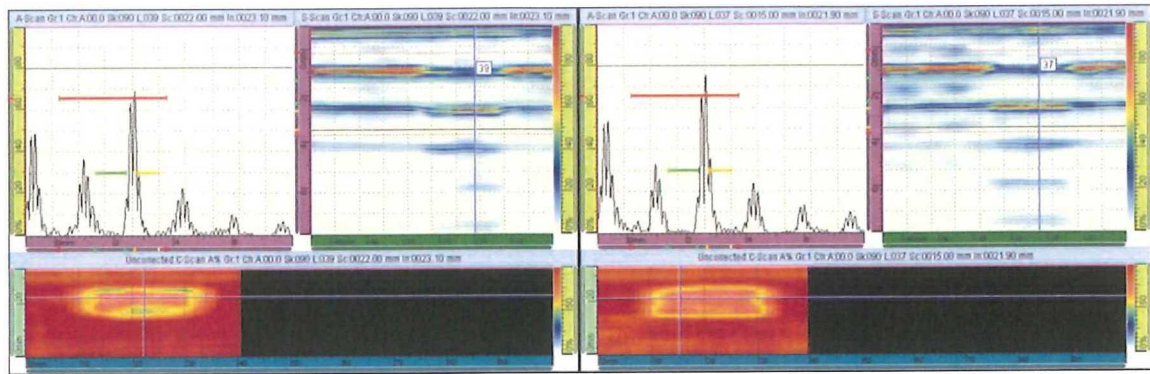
PA Scan of USW141001-01 which is welded with 720 [J].
